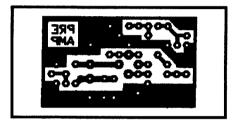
Full size copy of the etching pattern for the component side of the circuit board.
